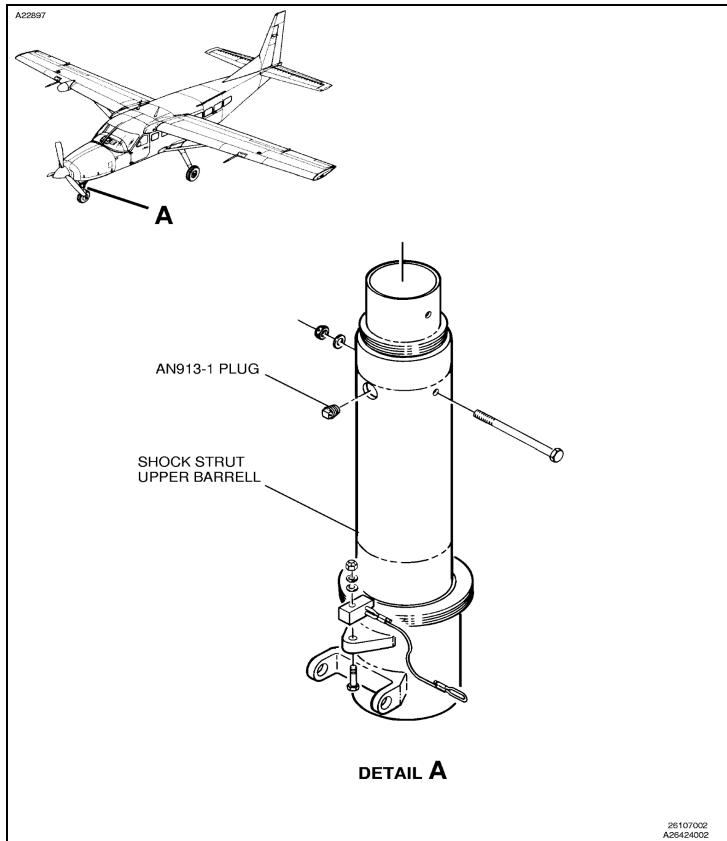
Sheet 1 : Nose Gear Shock Strut Servicing
